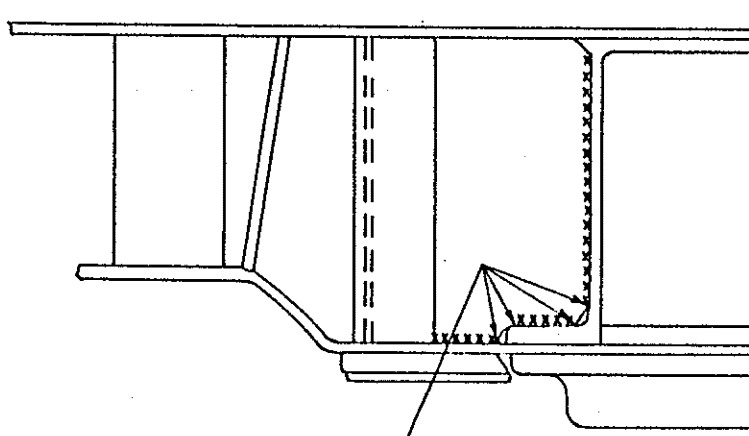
Fatigue Crack in Center Sill of Open-Top Hopper Car Involved in FAST Tests.
